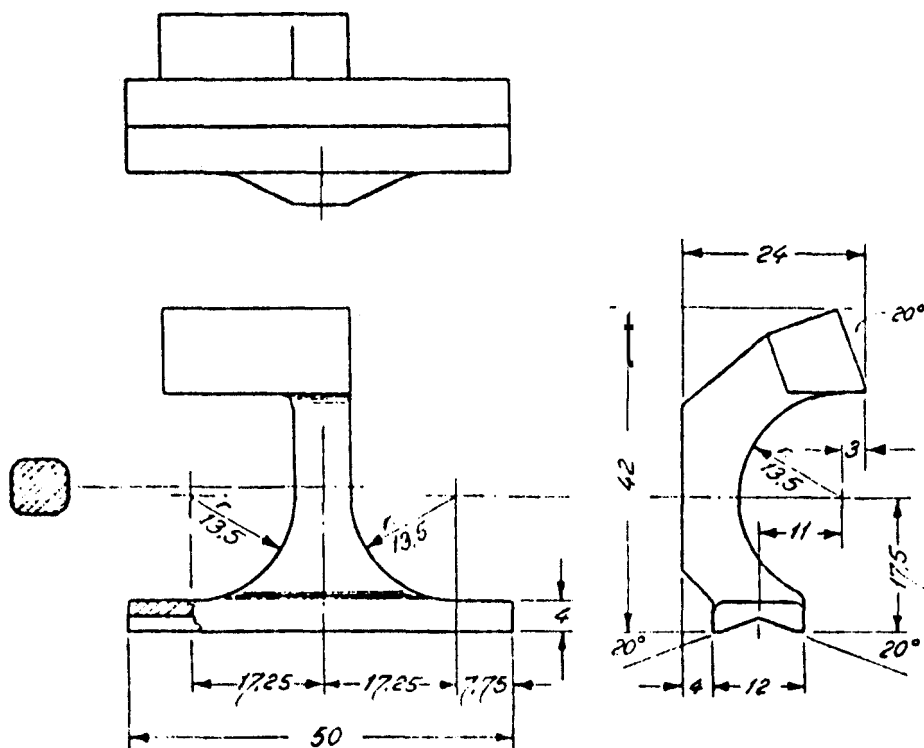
Handle adaptor manufactured in lightweight metal, magnesium or aluminum alloy
